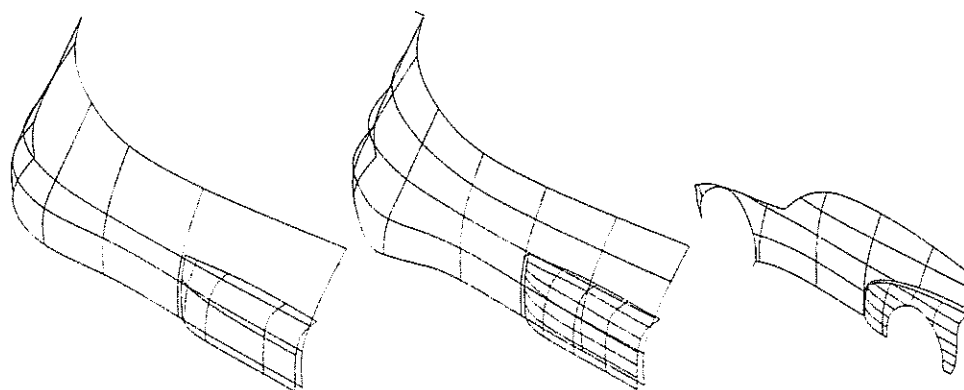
Wires, base surfaces, and trimmed surfaces of the side of the car
